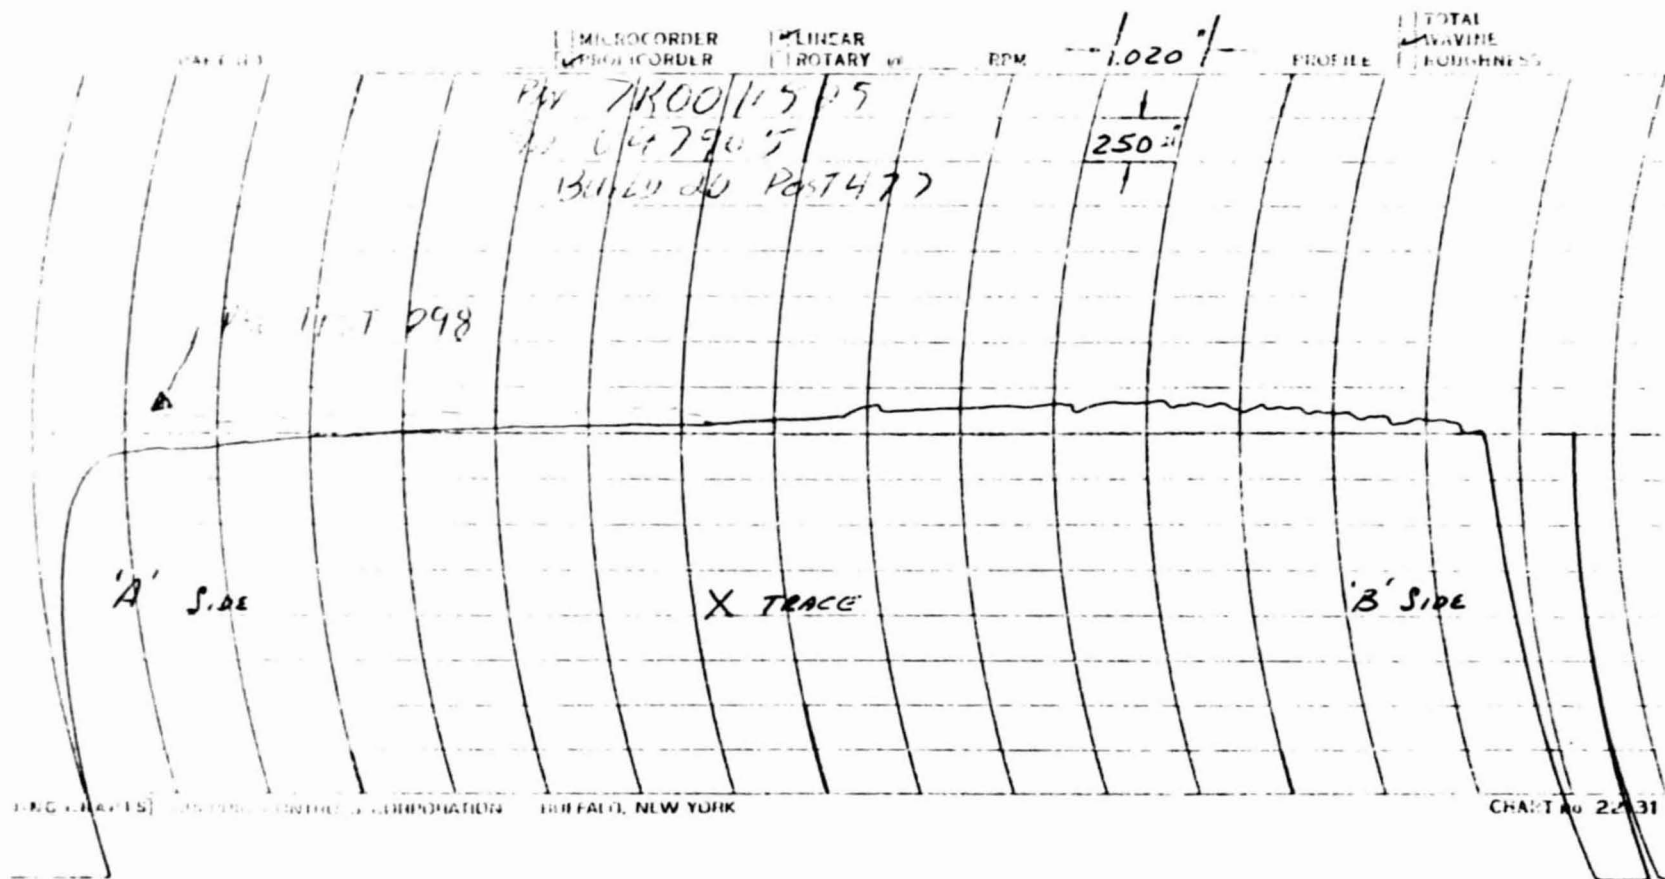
Surface Profile Trace Pump End, Primary Seal Ring,
